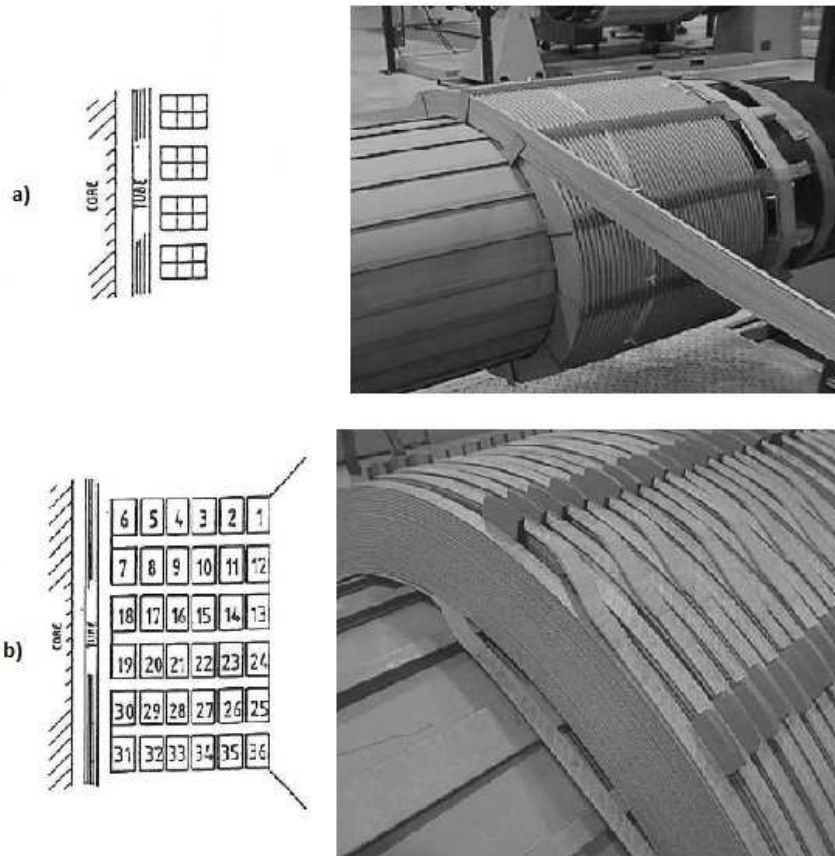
Types of transformer windings: a) spiral (helical) winding; b) disc winding [19],[20].
